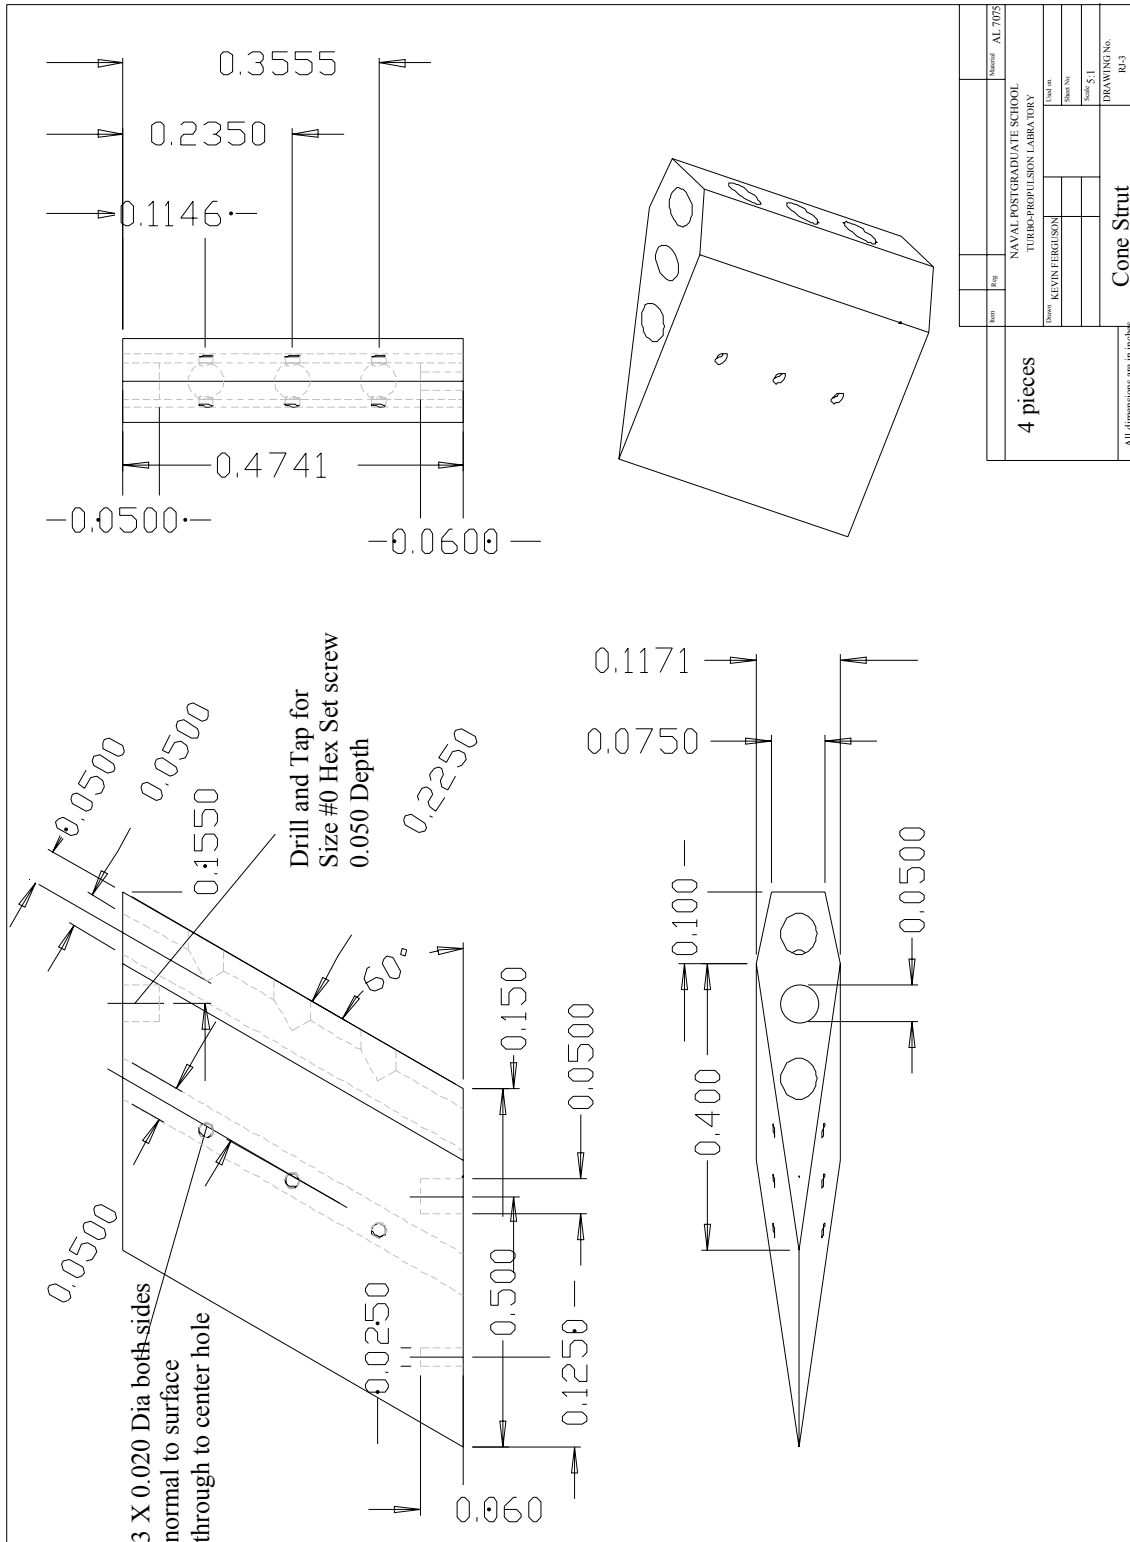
Part drawing: Ramjet fuel injecting strut (RJ-3)
